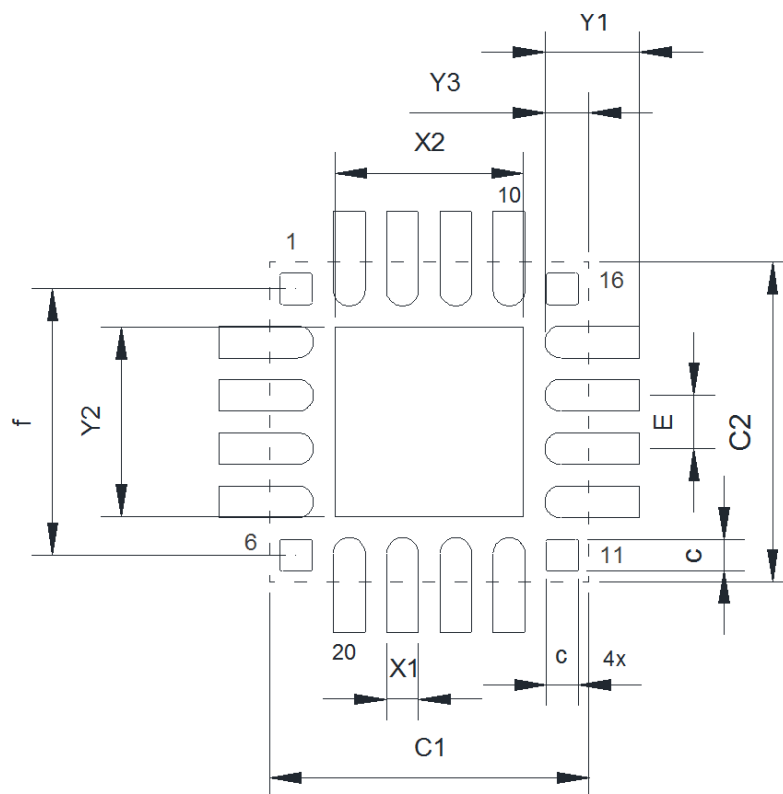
20-pin QFN PCB Land Pattern (Top View)
